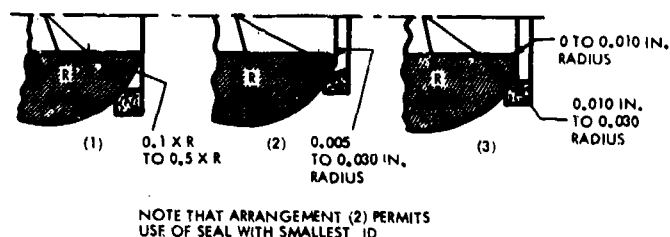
Shaped Bore Edges to Minimize Seal Damage by Ball
